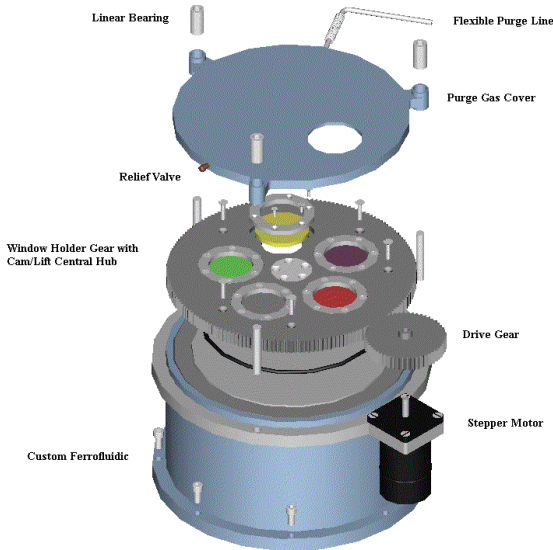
One of the most unique aspects of the T-ReCS design is the remote controlled window exchange mechanism, which is mounted on a large ferrofluidic feed-through in the vacuum jacket.
